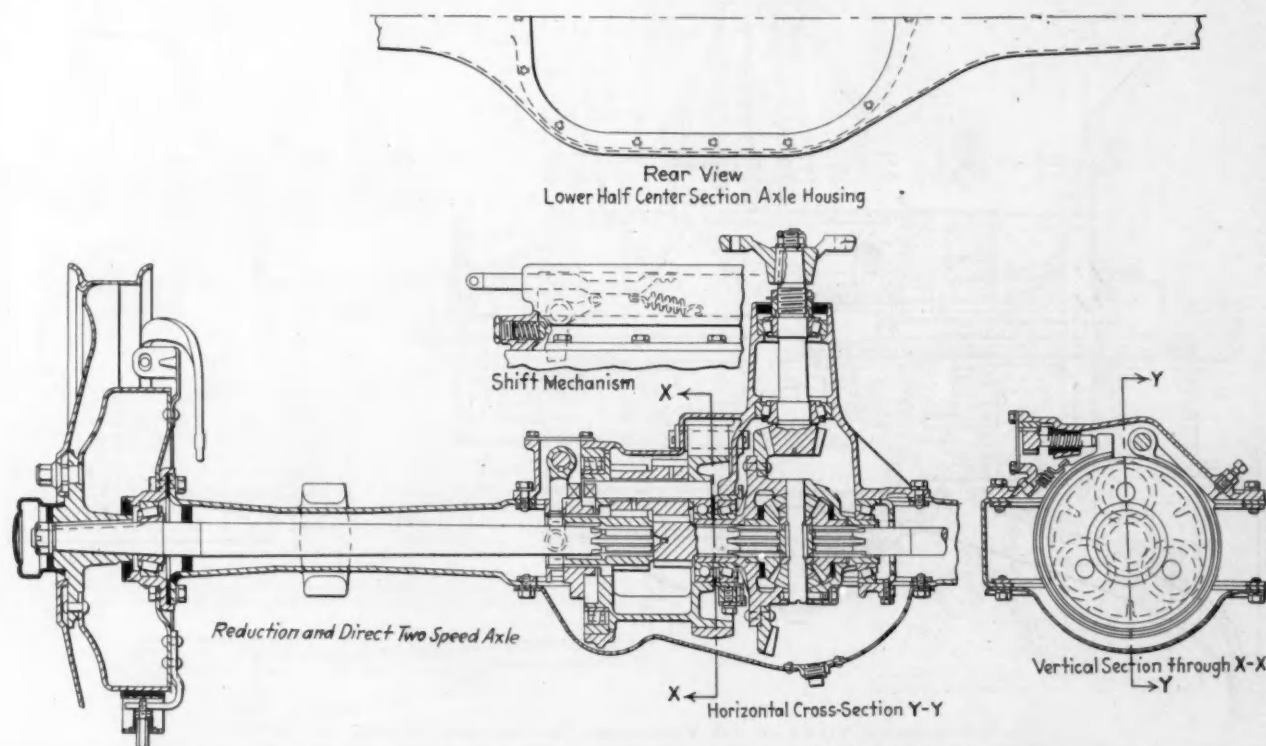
ASSEMBLY VIEWS OF THE TYPE OF CONSTRUCTION SHOWN IN FIG. 3
